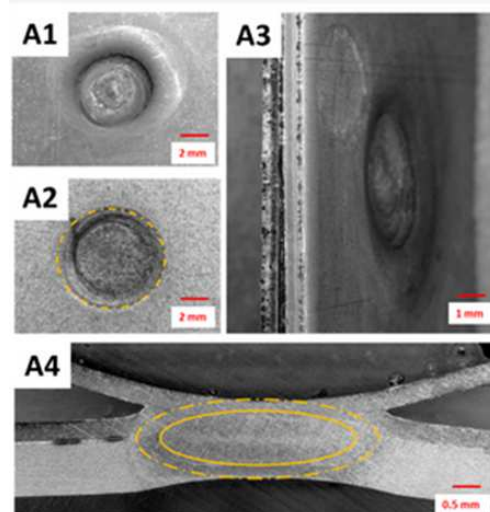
Spot welds produced by shunt current-assisted resistance spot welding: (A1) top view, (A2) bottom view, (A3) side view, (A4) cross-section at low magnification [17]
